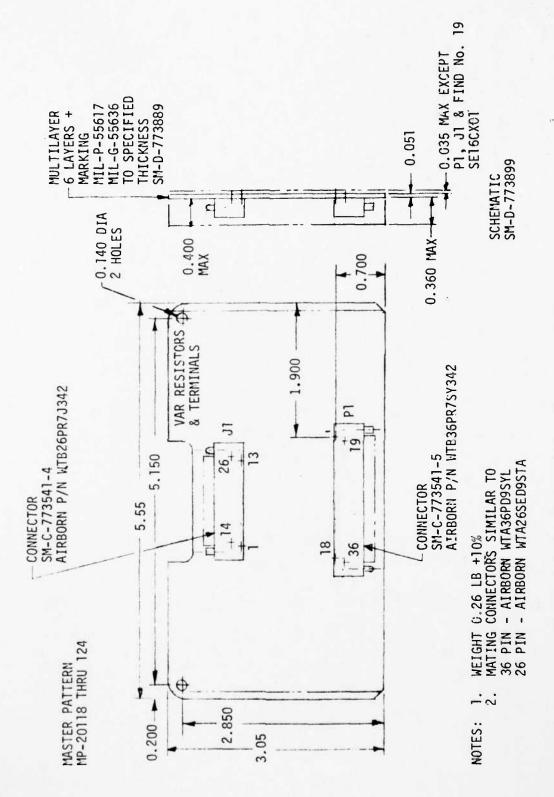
Postamplifier/Control Driver Outline Dimensions
